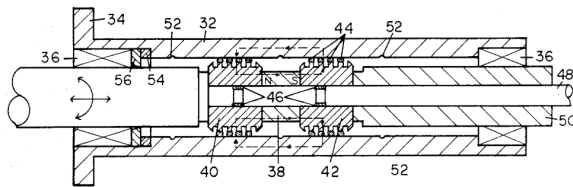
Ferrofluid seal to provide a hermetic seal about a shaft engaged in linear motion [72].
